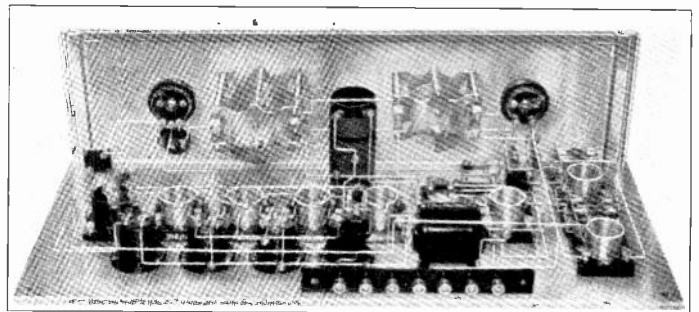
This view shows the wiring and parts arrangement of a battery operated receiver, which is very easy to construct.
